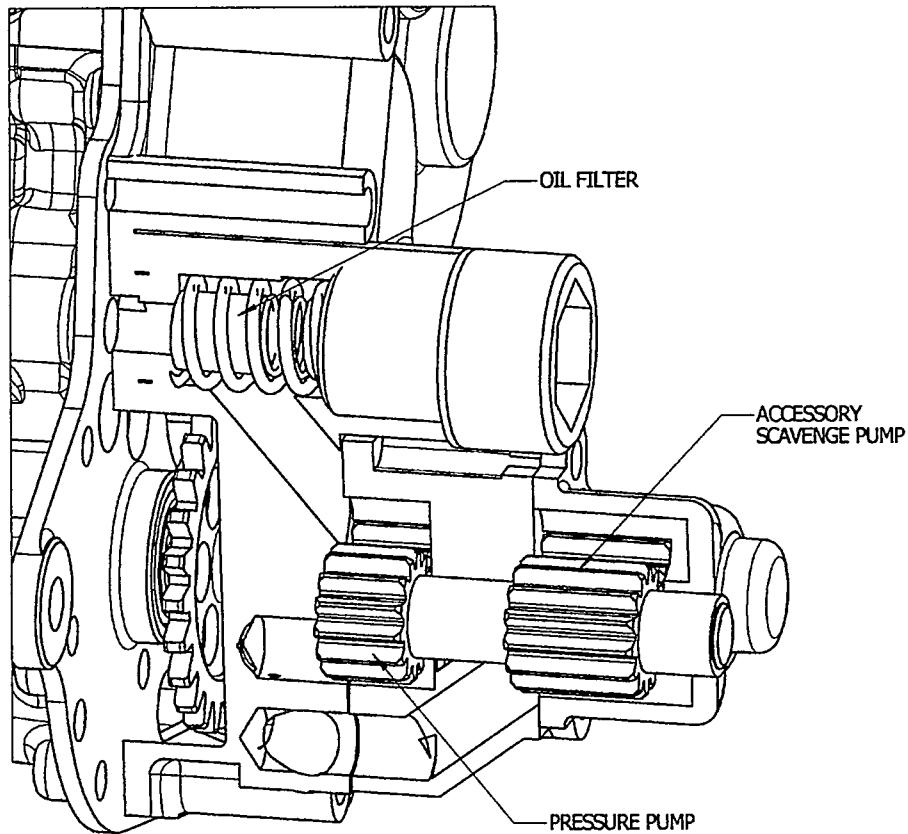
Detail cutaway of the oil-pump stack at the lower rear of the engine.
